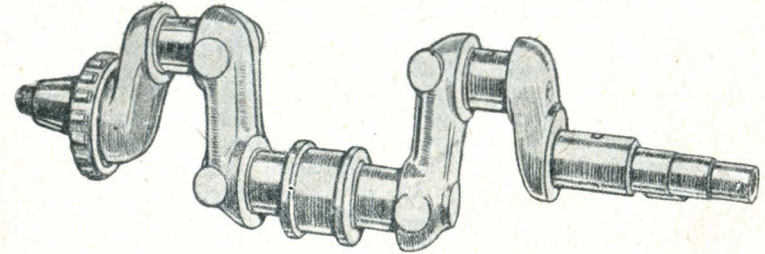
THE STURDY AND WELL-BALANCED MINOR CRANKSHAFT
